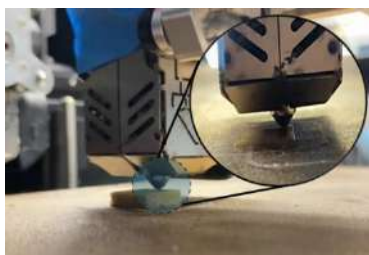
The Voladora NX+ 3D nozzle printer used for printing a honeycomb structure.
